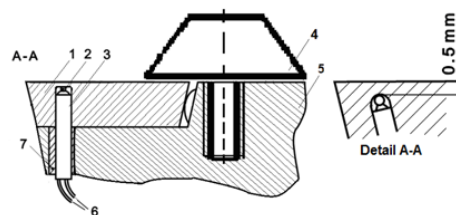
Prepared cutting insert with thermocouple installed in the body of the milling head
